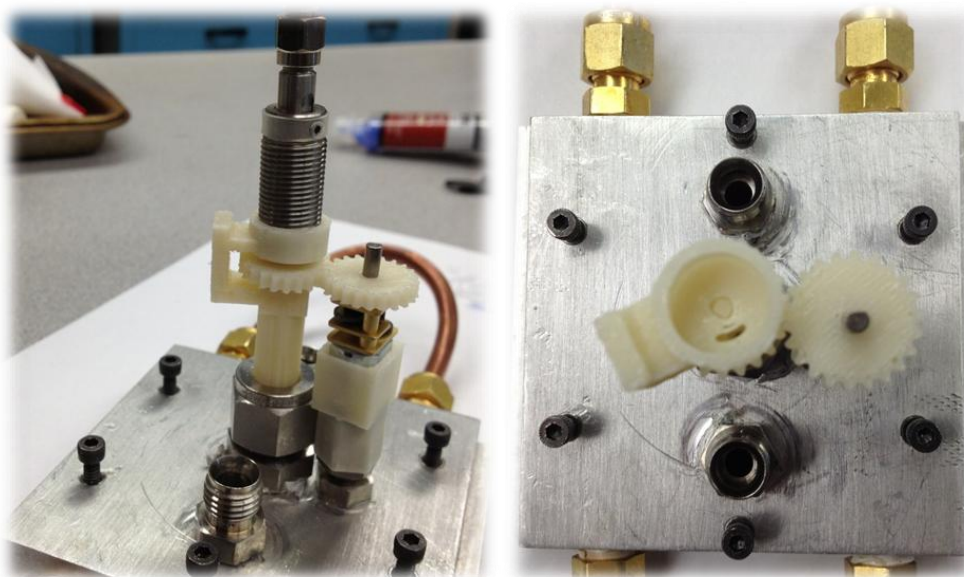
A pair of images of the 3D printed drive train assembly mounted on the reactor cap during test
